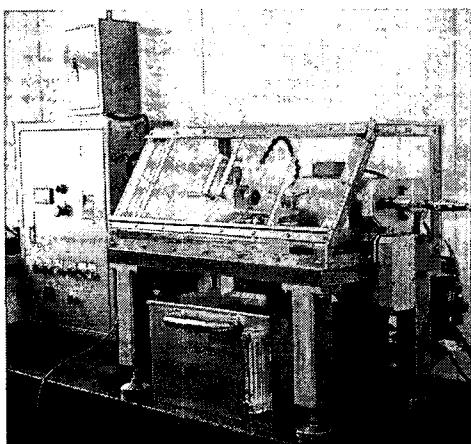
Mock-up drilling device for a center hole on a simulated fuel rod
